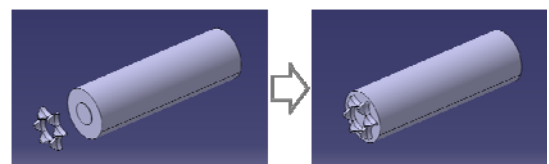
Appearance of the fabricated tip attached to the actual tool shank
